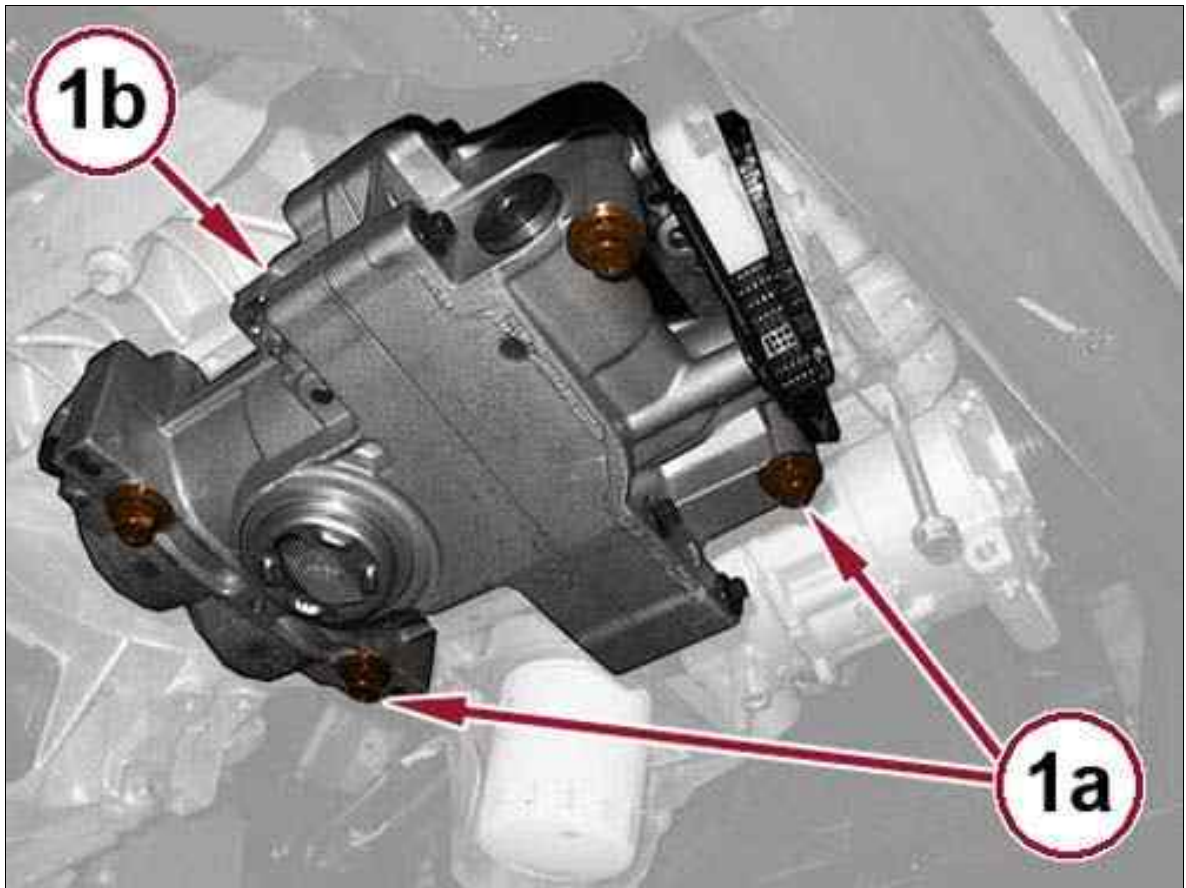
A/C Conditioning Compressor, Oil Pump Chain Link, Clamp & Bolt
